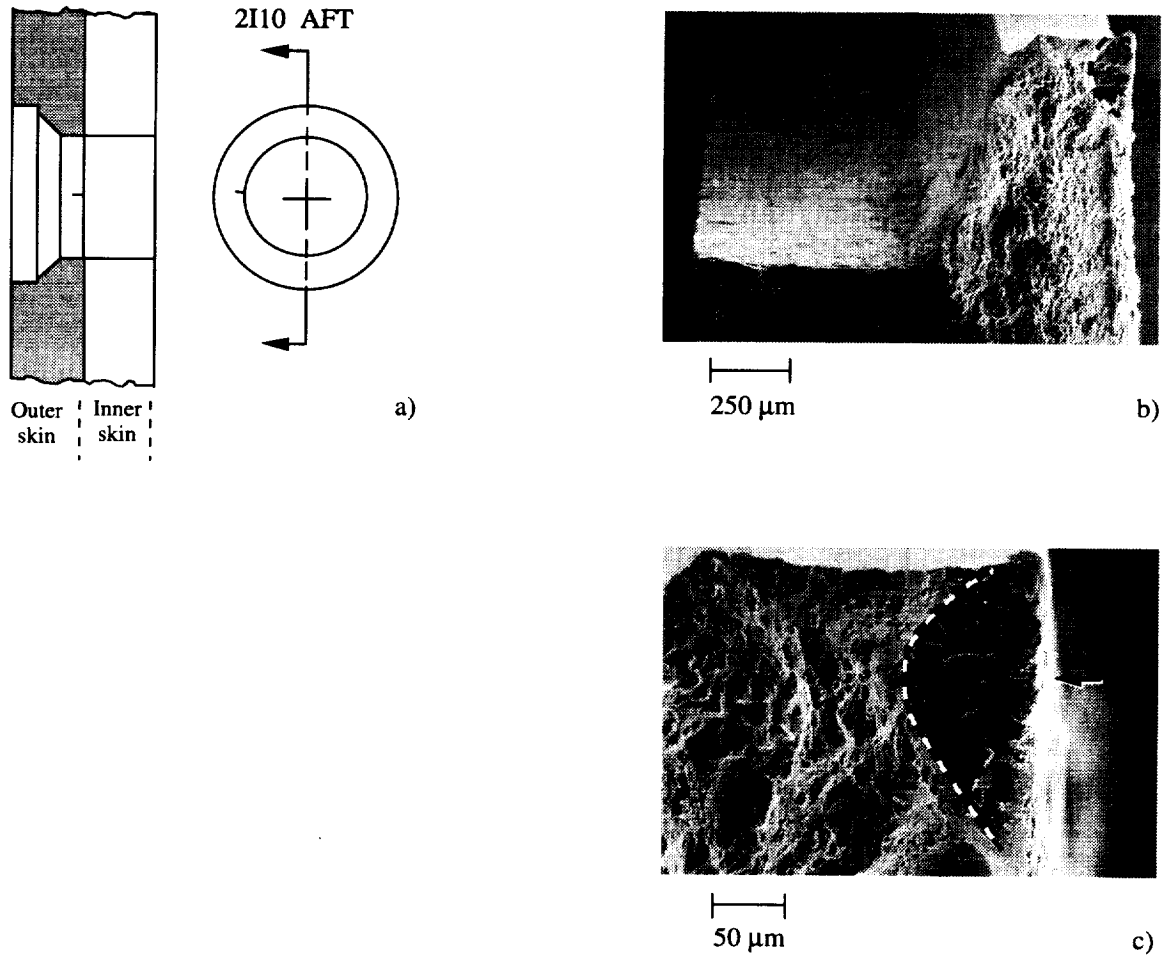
a) The schematic shows the rivet hole 2I10 configuration and the location of the outer skin fatigue crack oriented in the aft direction and about the 9 o'clock position. b) The SEM micrograph shows a small fatigue crack located at the rivet hole shank region along the faying surface. The dashed line marks the fatigue crack front. c) The SEM micrograph shows the small fatigue crack at high magnification. The dashed line marks the fatigue crack front. The crack initiated in a roughened region along the faying surface.
